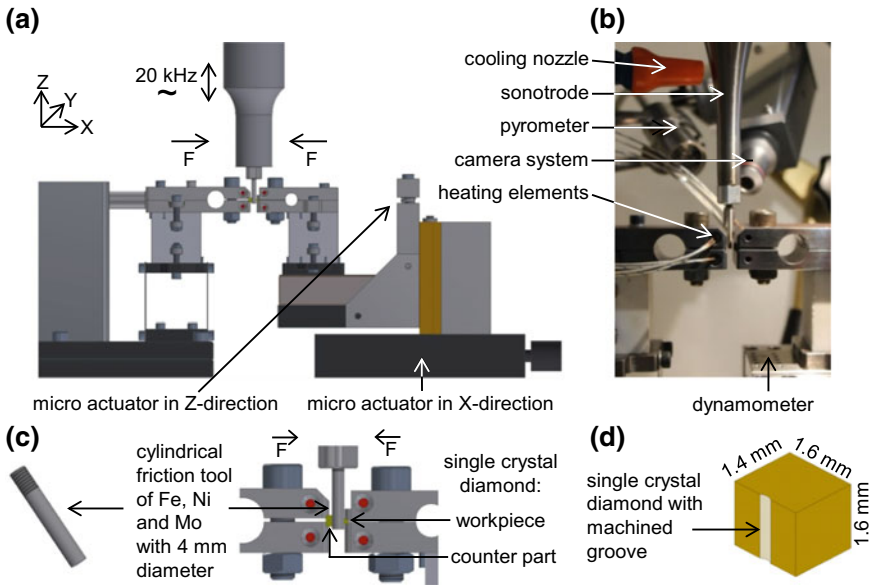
Experimental setup of ultrasonic assisted friction polishing with pure metals: overall machining setup (a); realized setup (b); workpiece and tool engagement (c); machined single crystal diamond (d)
